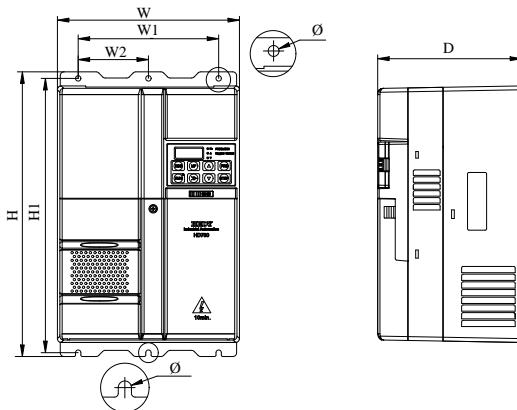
Mechanical dimensions and mounting (Size D, E)
